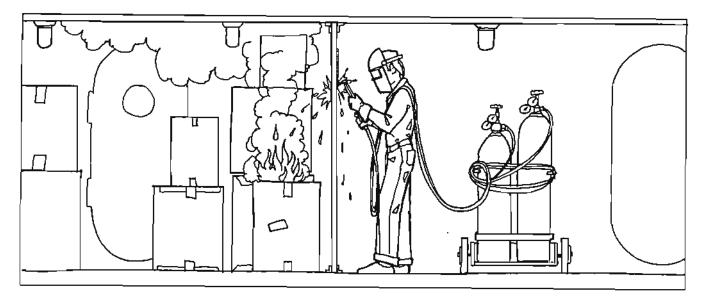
You're got to keep watch on all sides of welding, burning or cutting operations.
